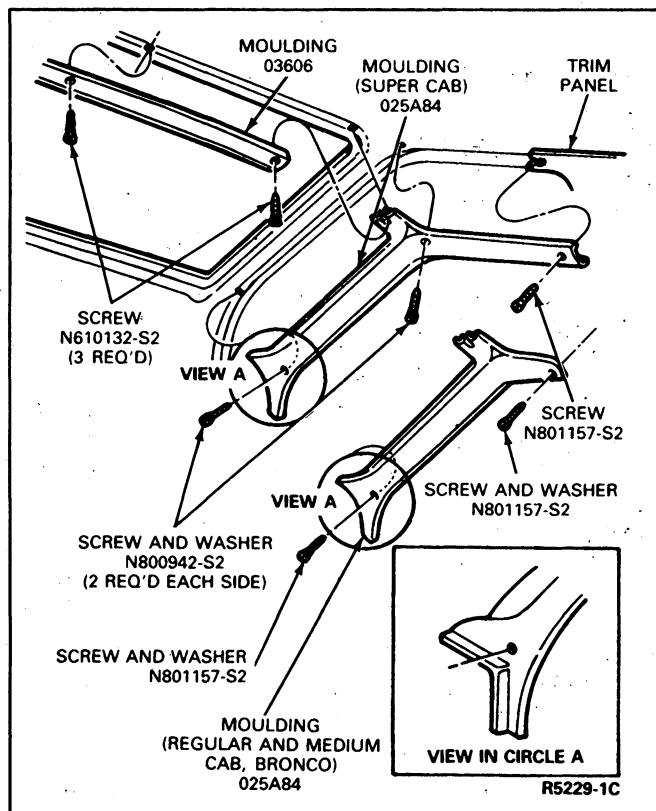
Window Interior Garnish Mouldings—F-150—F-350, F-350 Crew Cab, F-Super Duty and Bronco
